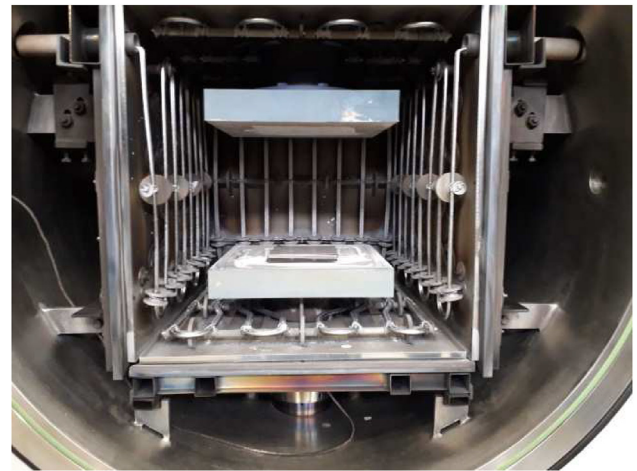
Diffusion welding machine of the ZEA-1 with the door open. In addition to the heating elements, the base plate with the bipolar plate to be joined and the ram are visible.
